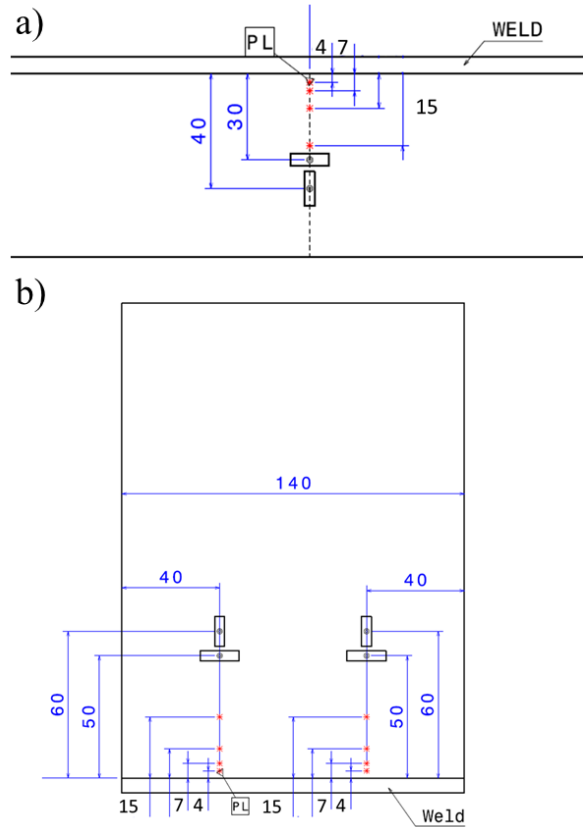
Thermocouple and strain gauge locations on the butt-welded plates: a) butt-welded plate with the long weld along 400mm edge and, b) butt-welded plate with the short weld along 140mm edge.
